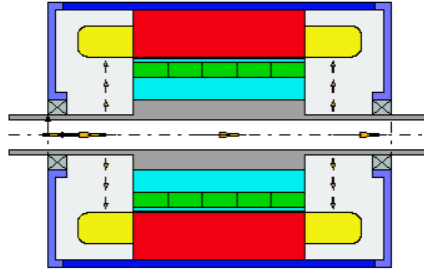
Axial cross section of the motor with the shaft spray cooling system.
